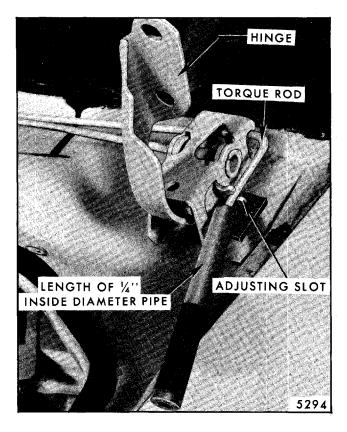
Rear Compartment Torque Rod Adjustment - F Styles
